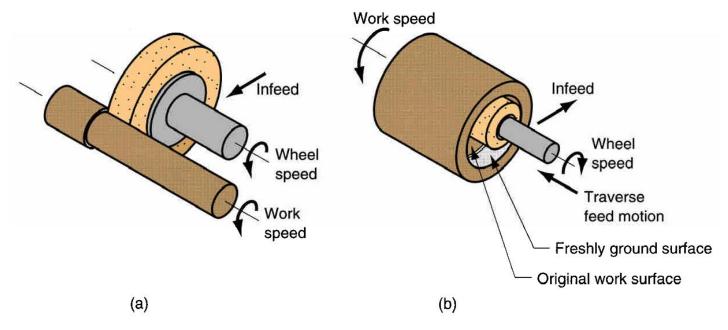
Two types of cylindrical grinding: (a) external, and (b) internal
